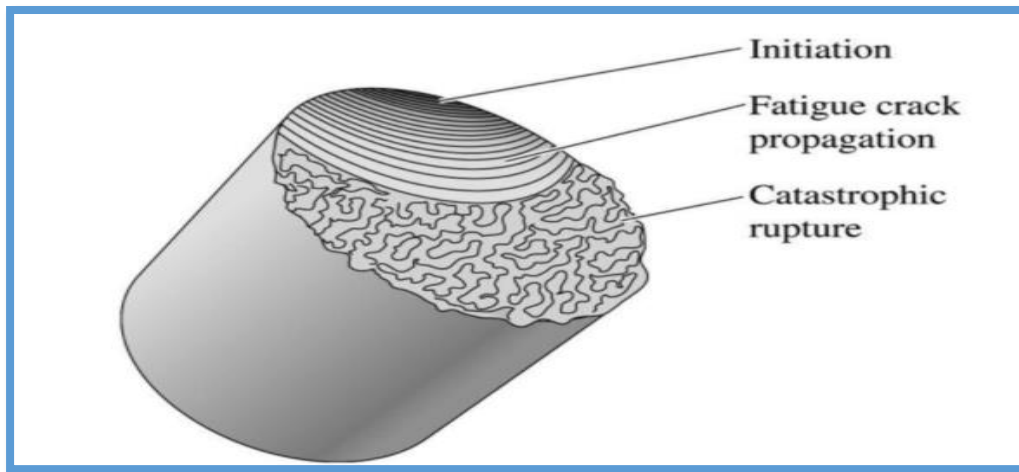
Schematic of the fracture surface of a steel shaft that failed in fatigue.
